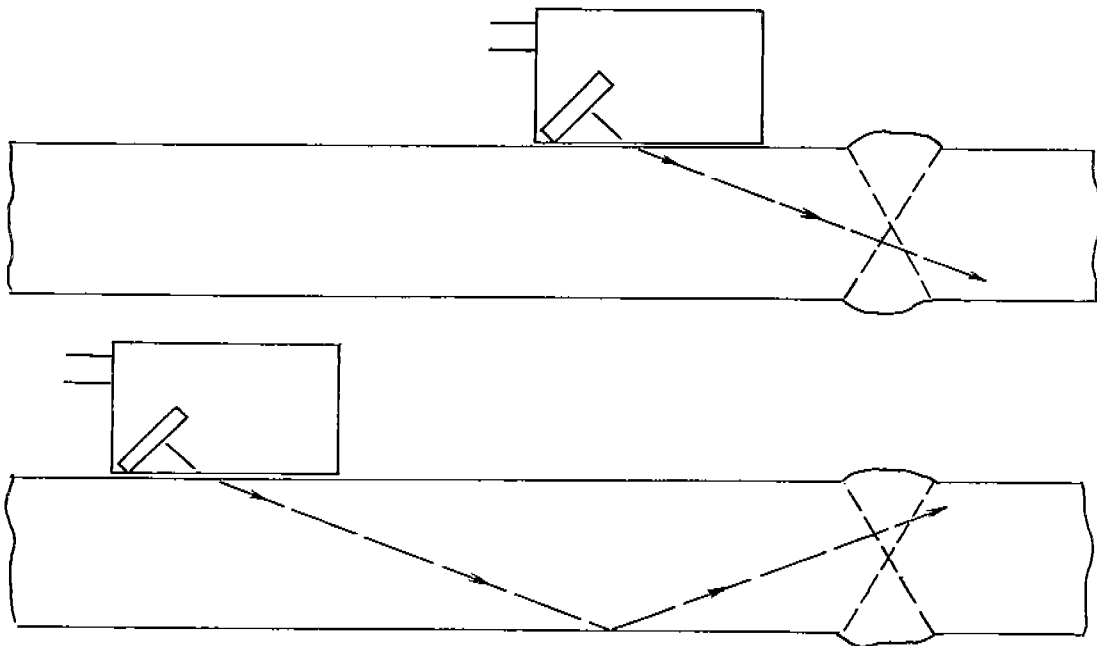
TECHNIQUE FOR INSPECTING BUTT WELDS WITH SHEAR WAVES
